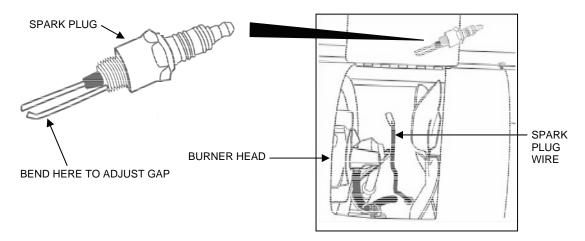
Diesel Heater Spark Plug Removal and Adjustment.
